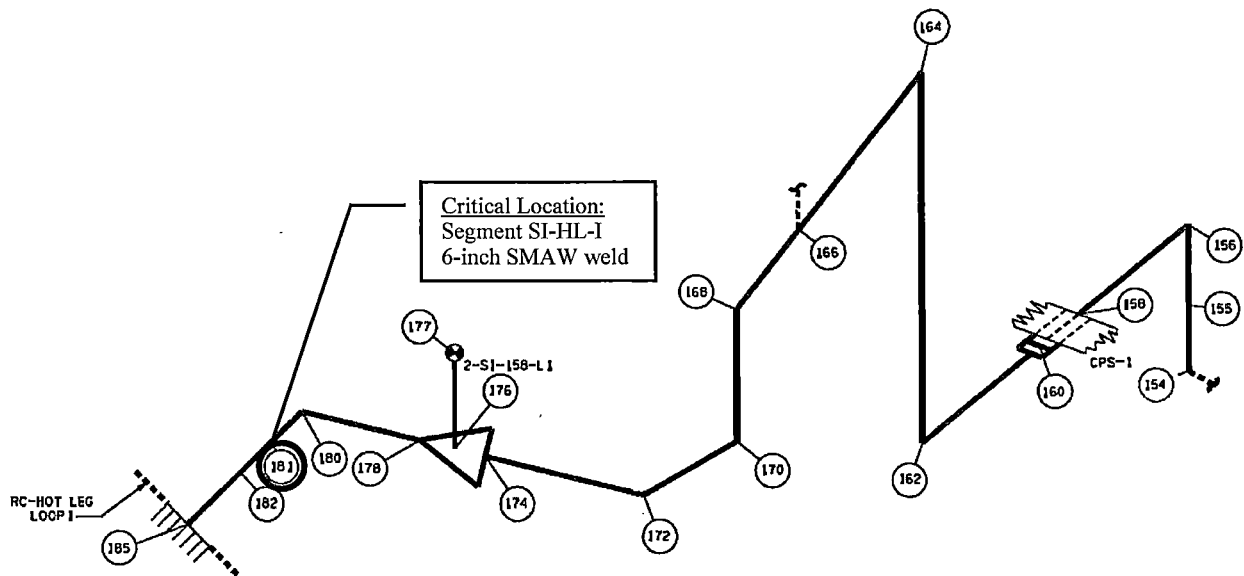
D.C. Cook Unit 2 Hot Leg SI Line Loop 1 Critical Weld Locations
